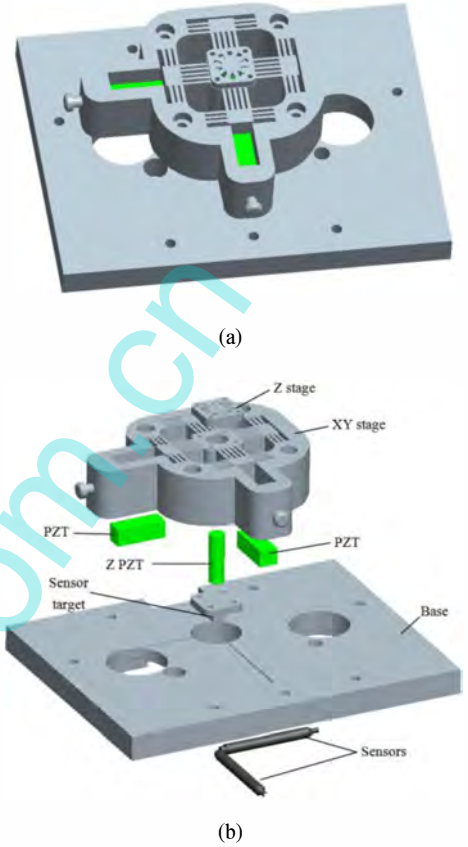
3D solid model of the XYZ scanner. (a) Assembly view and (b) Exploded view.
